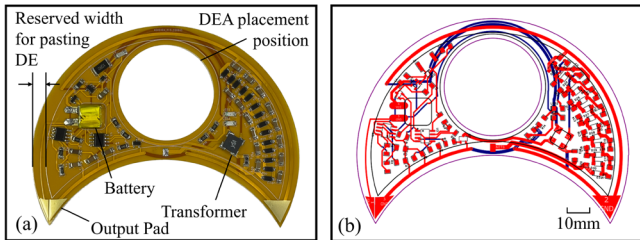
(a) Front view of drive control system circuit FPC. (b) PCB design diagram.
